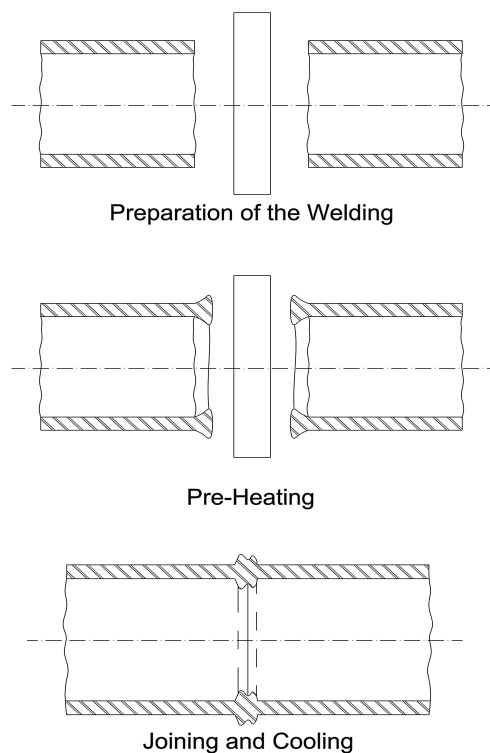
HDPE welding process. Adapted from Polyethylene Jointing – Vinidex Pty Ltd.
